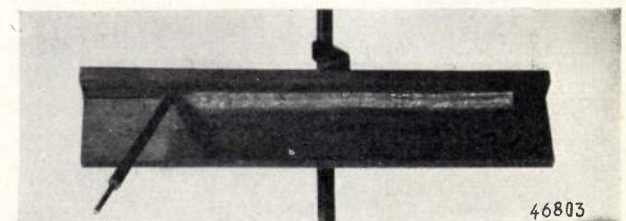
Overhead weld made with Contact 15-3-25.
